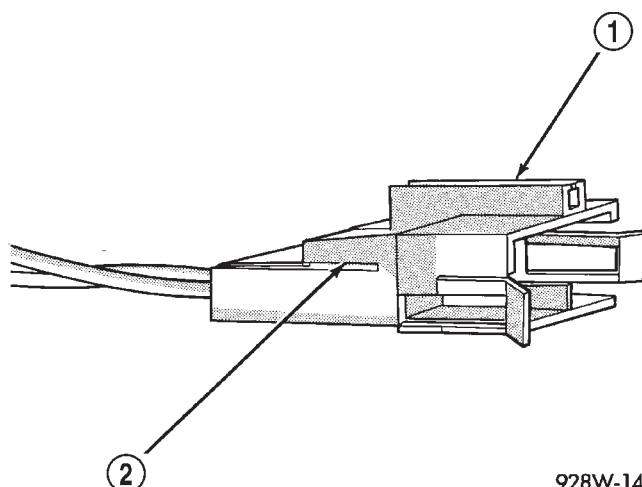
Using Special Tool 69321 - SPECIAL TOOL 6932
